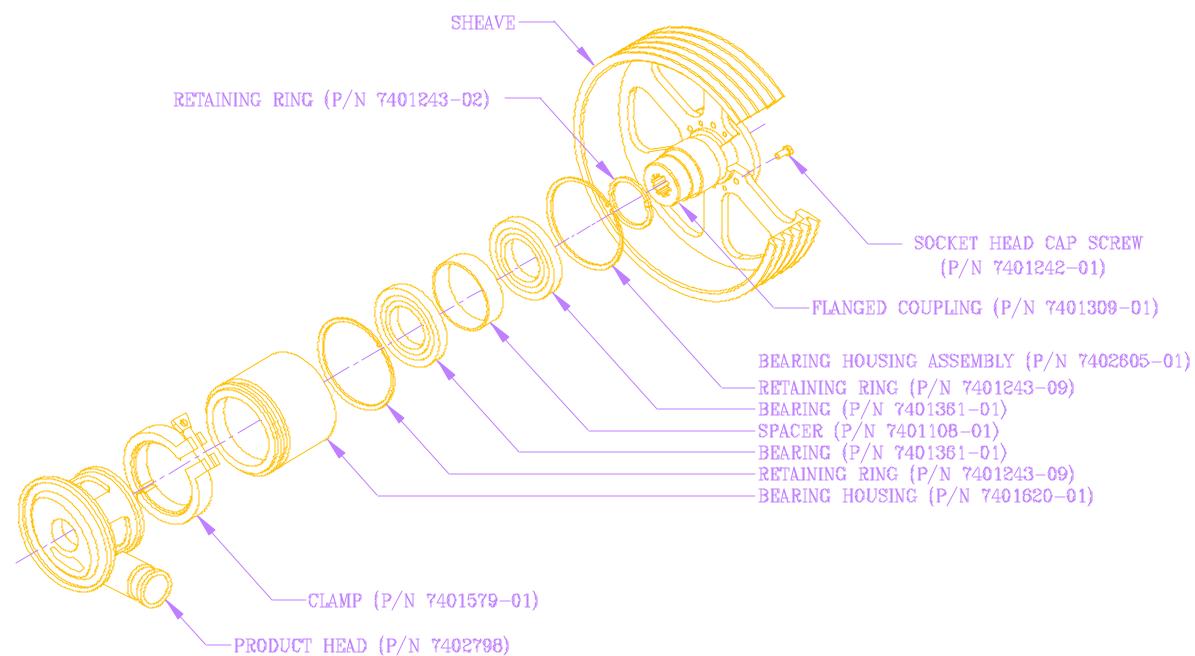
Upper Bearings, Belt & Sheave, Electric Motor Drive, With Rotor Stop
